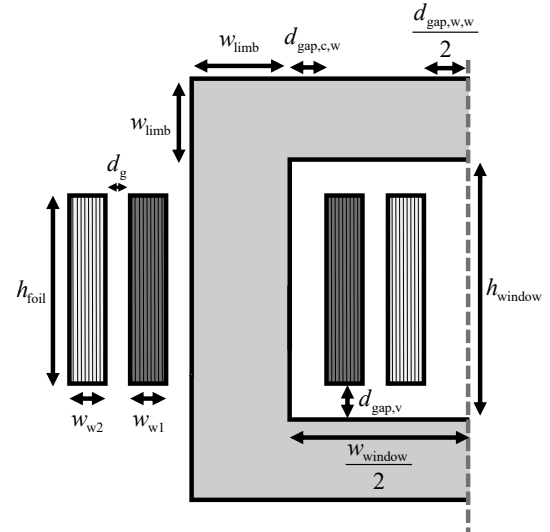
Core-type transformer. Dimensions and clearances between the components. 2D partial view.
